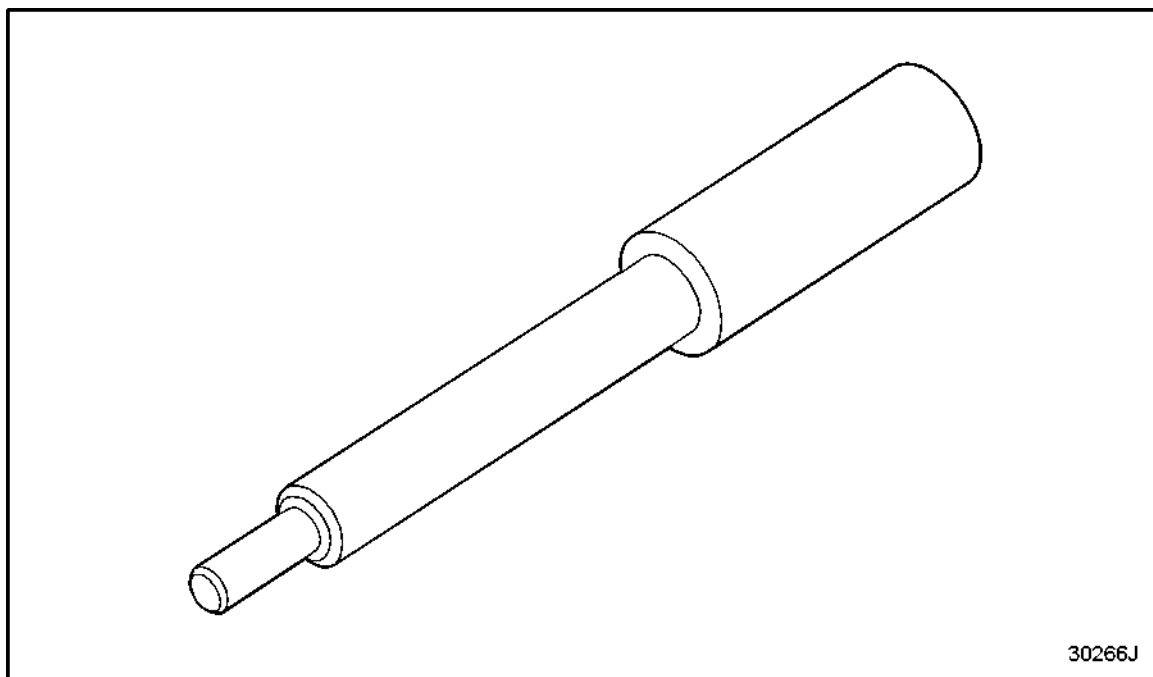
Nozzle Sleeve Installer,J 39261
